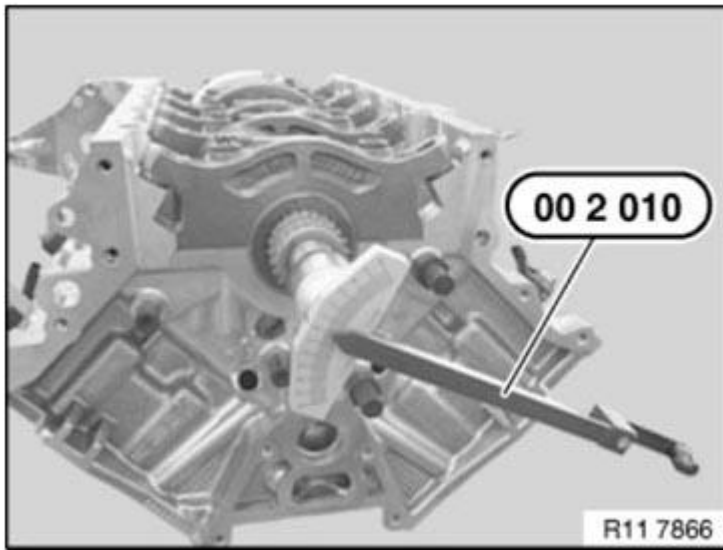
Checking Crankshaft Breakaway Torque With Special Tool 00 2 010
